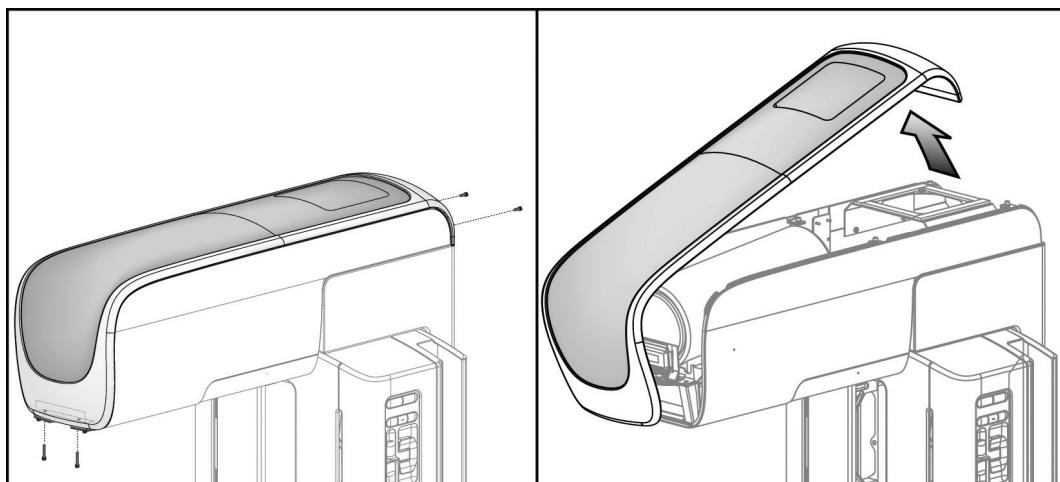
Top X-ray Tube Arm (Tubehead) Cover Removal
